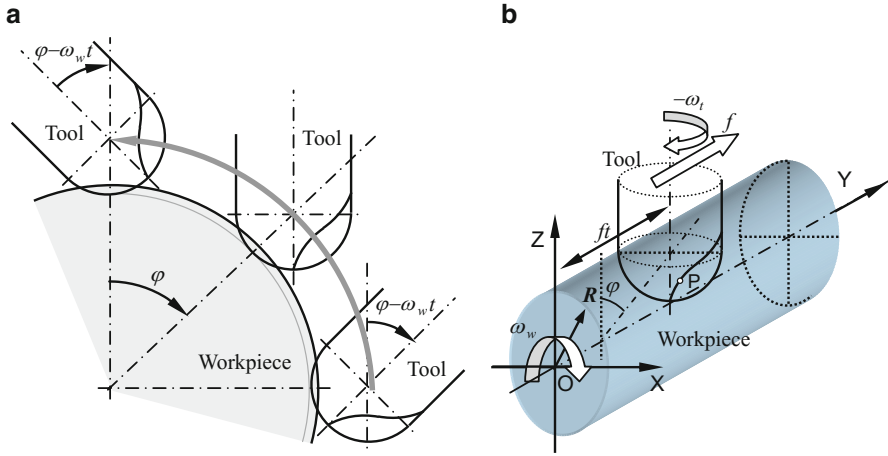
Analytical model: (a) tool rotation around workpiece; (b) tool feeding along workpiece axis
